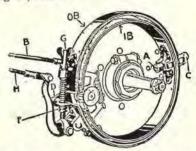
A combination of an internal expanding and external contracting brake on brake drum of rear-wheel hub. OB is the outer or external and 1B is the inner or internal. B is the hand-brake rod operating the internal brake. H is the footbrake rod operating the external brake. An example of adjusting this type of brake is shown on page 889, Fig. 9, which is similar. For the method of adjusting and relining brakes, see Index. This subject is treated in the Repair Section of this book.
